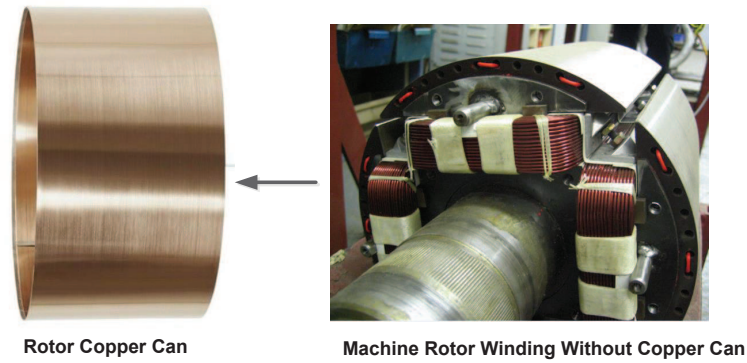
Machine Rotor Winding and Rotor Copper Can Damper Winding.
